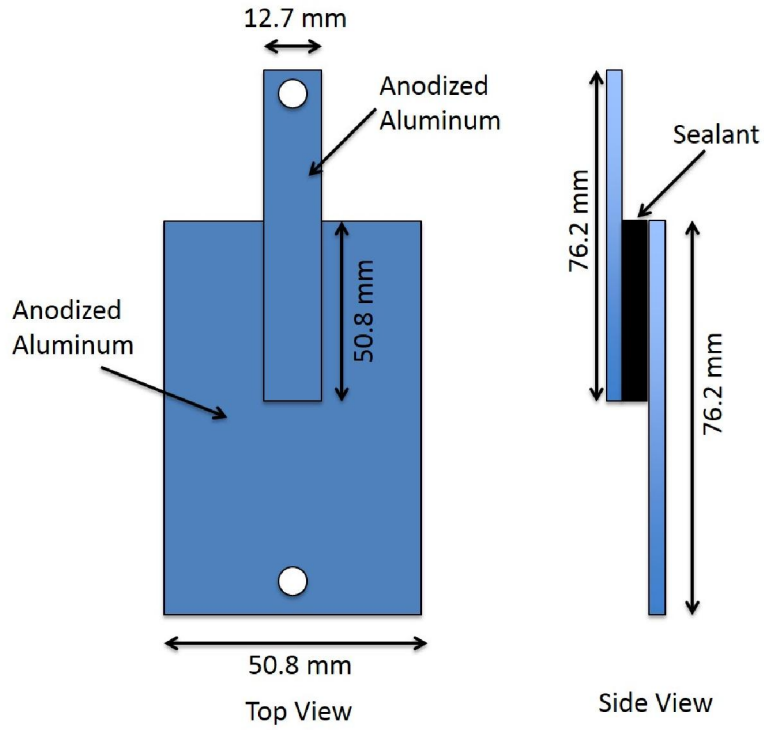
Geometry of the Al-Al specimens used for ramp to fail and creep rupture tests
